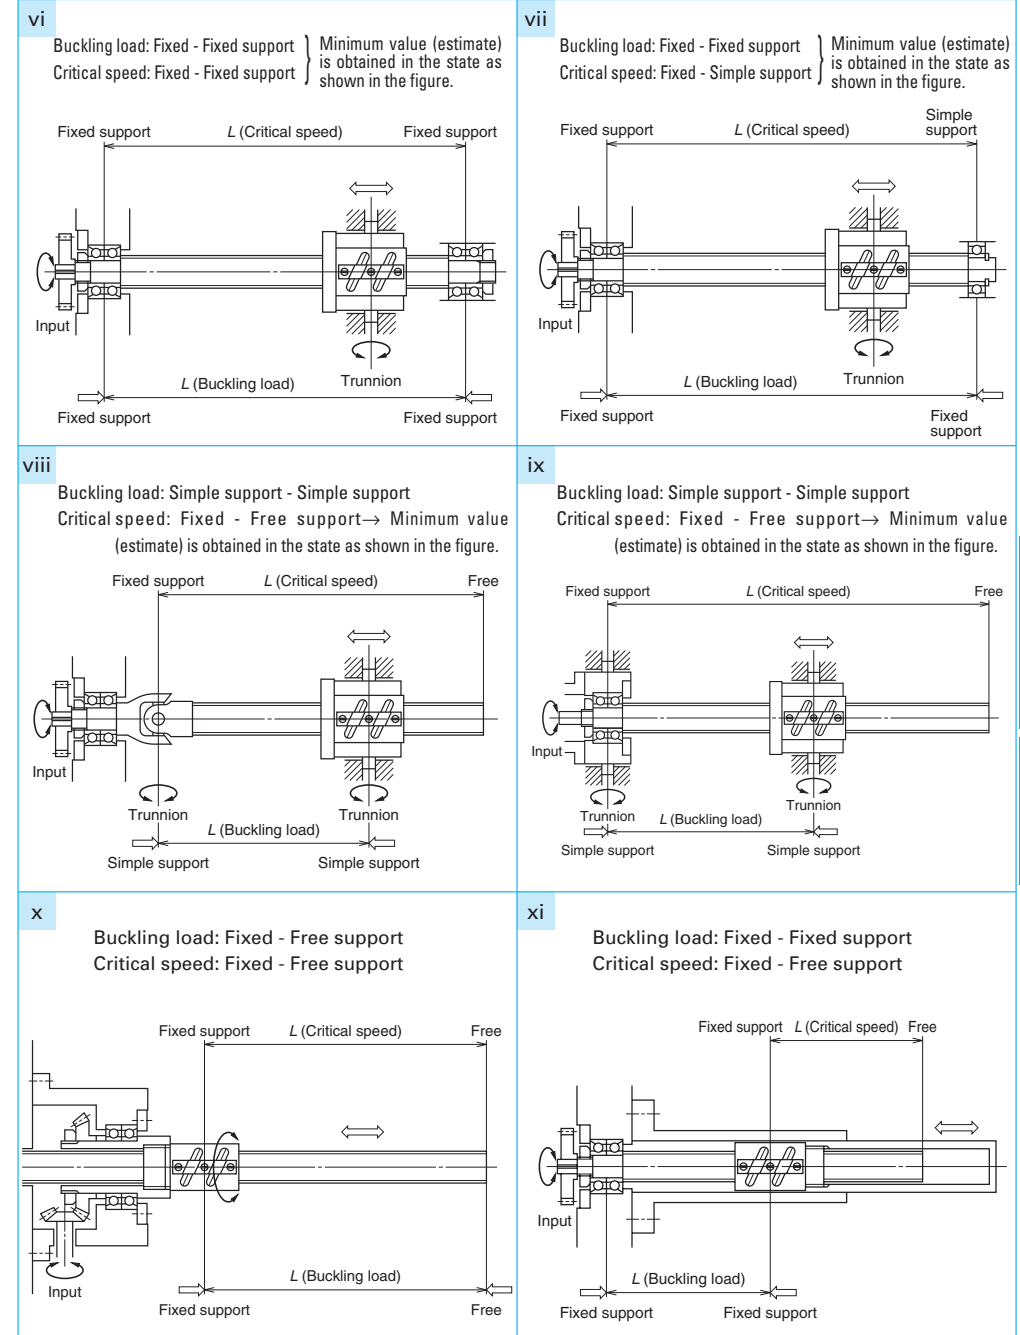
Supporting conditions of screw shaft and ball nut
